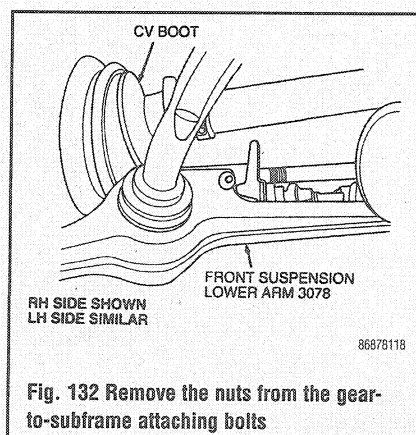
Remove the nuts from the gear-to-subframe attaching bolts
